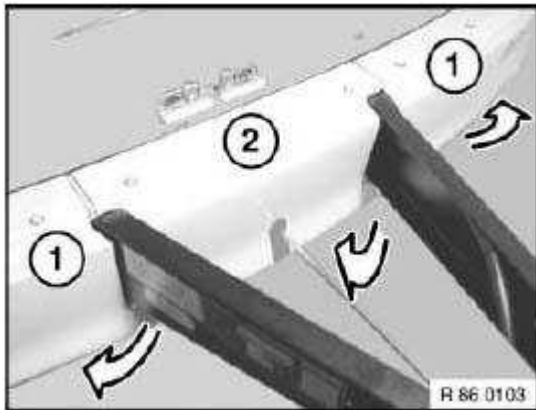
Press Side Sections To Side And Tilt Center Section Downward
